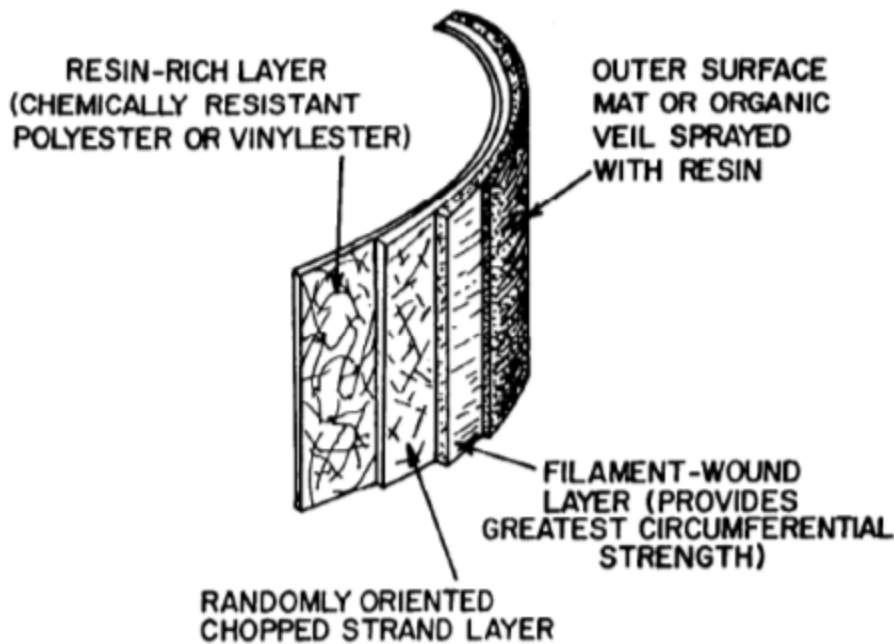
Cross-sectional view of standard vertical tank wall laminate.
